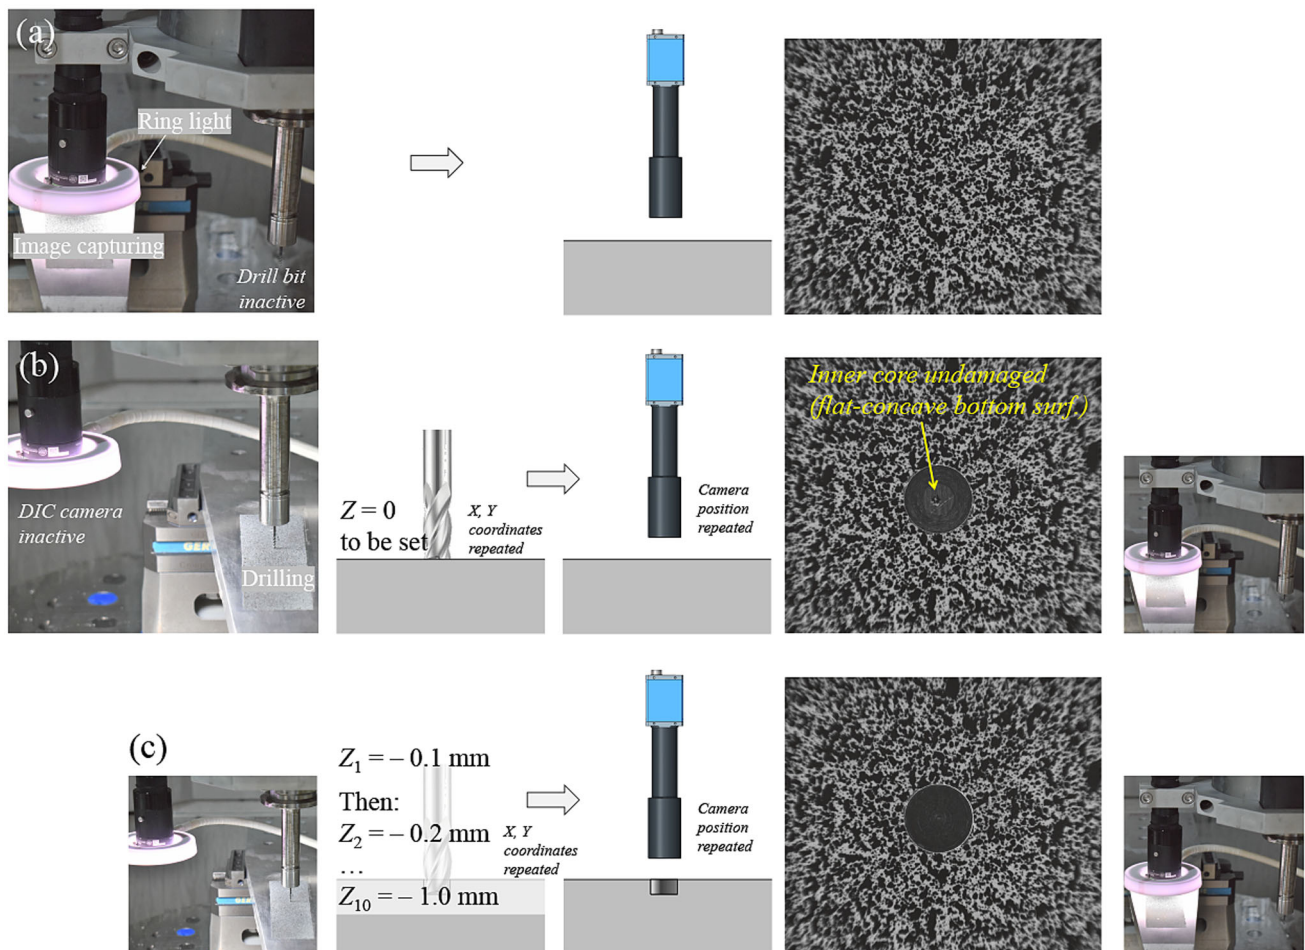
Detailed experimental sequence on the CNC machining center: (a) camera repositioned for image capturing with active ring light; (b) drilling phase highlighting the critical zero-depth setting ($Z = 0$);
